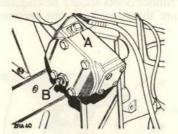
Rocker shaft adjustment A—Filler plug B—Adjuster
